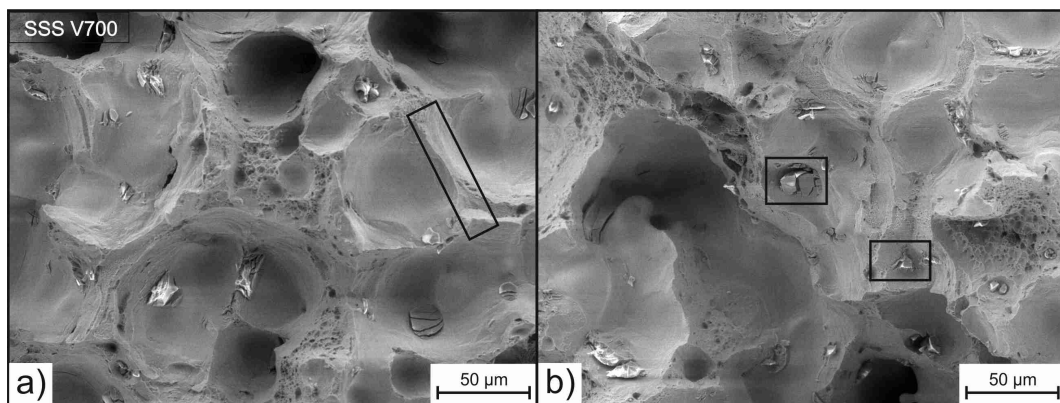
Overview of fracture surface, V700 specimen
